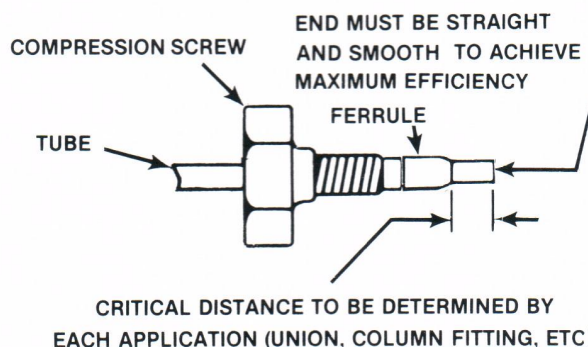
COMPRESSION SCREW AND FERRULE ASSEMBLY
